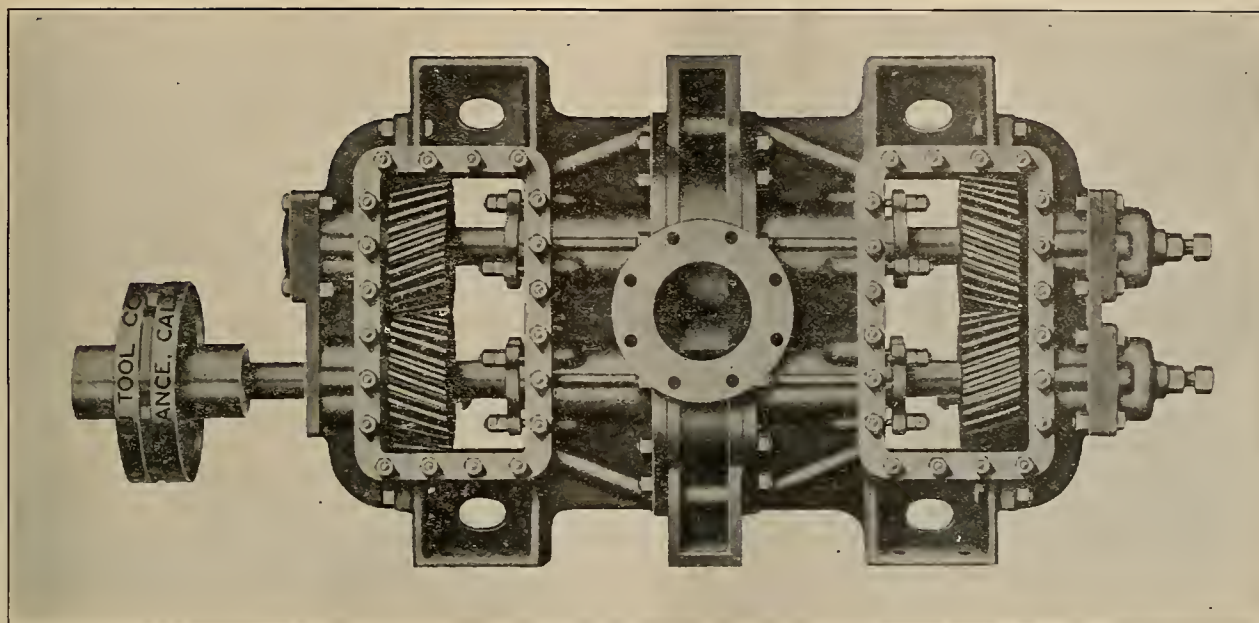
4-in. Ideal Rotary Pump with Gears Exposed.
